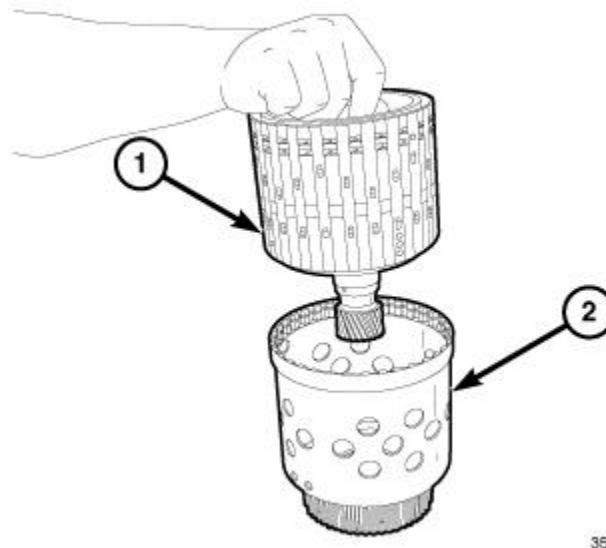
P4 Sun Gear/C/E Clutch Retainer & D-Clutch Drum
